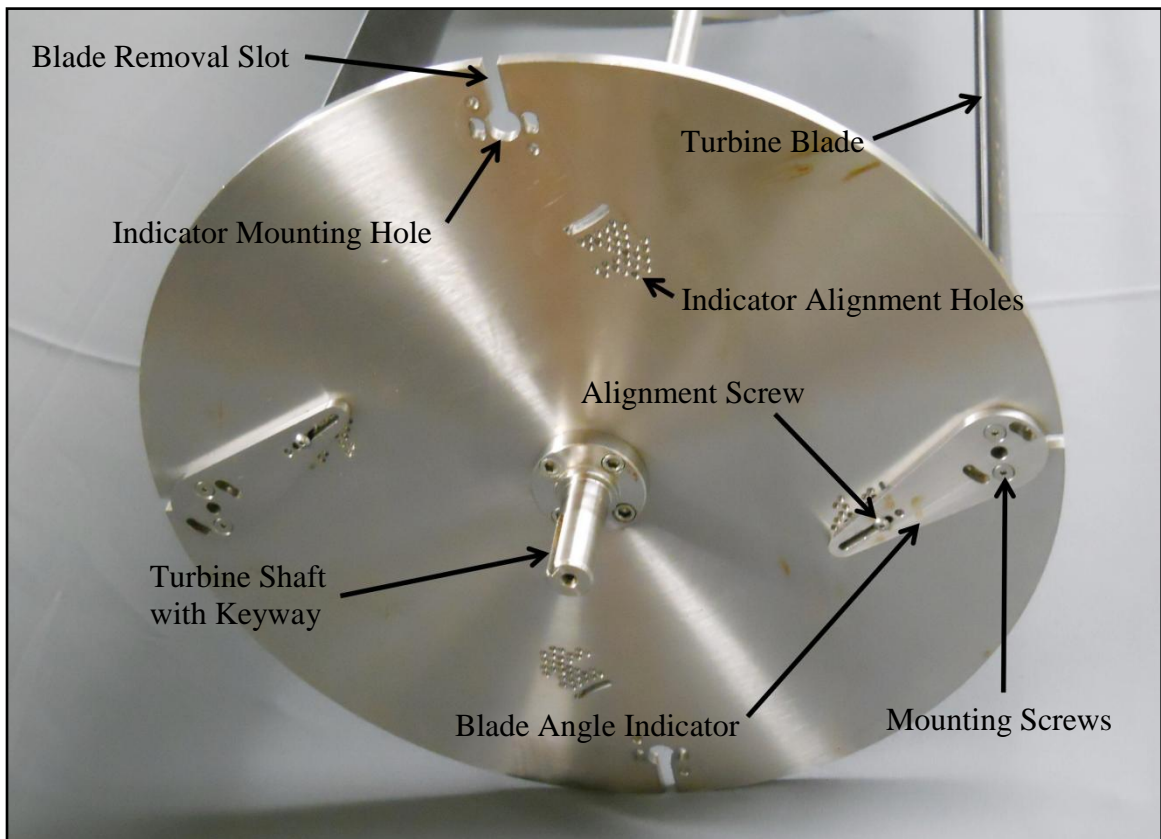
The lower turbine assembly (turbine rotor) is shown with blades, end plates, and angle indicators.
